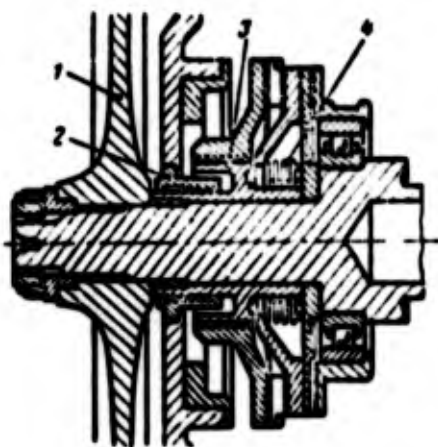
Contactless labyrinth and bellows seal: 1 — impeller disk; 2, 3 — labyrinth bushings; 4 — bellows sealing.
